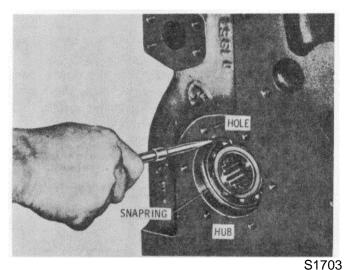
Installing Pump Drive Gear Hub Bearing Snap Ring
